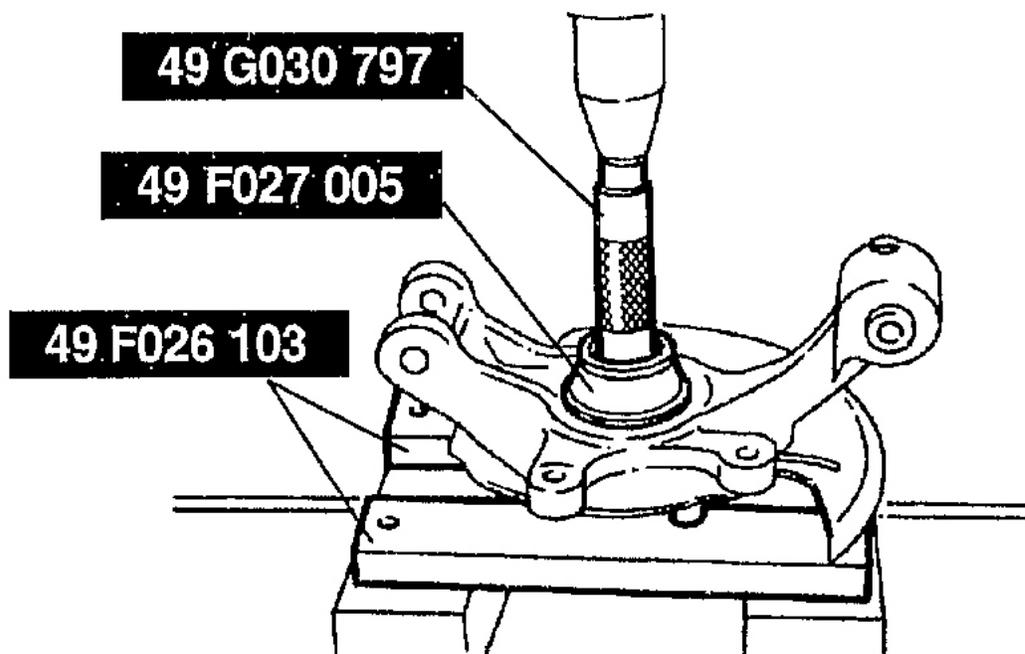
Pressing Rear Wheel Hub Component Out Using SSTs
